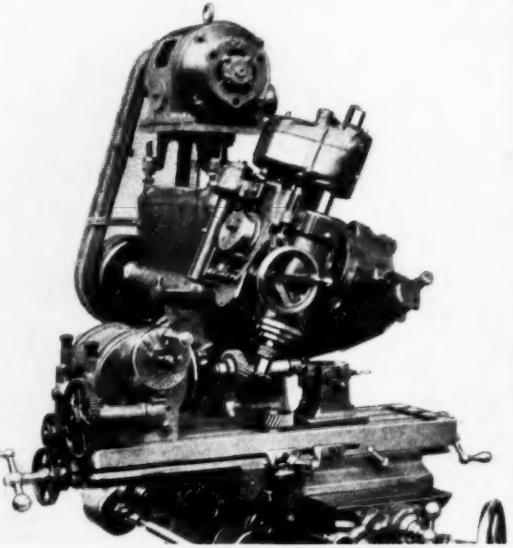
Miller-Shaper with Dividing Head Set up for Cutting Spiral Gears
